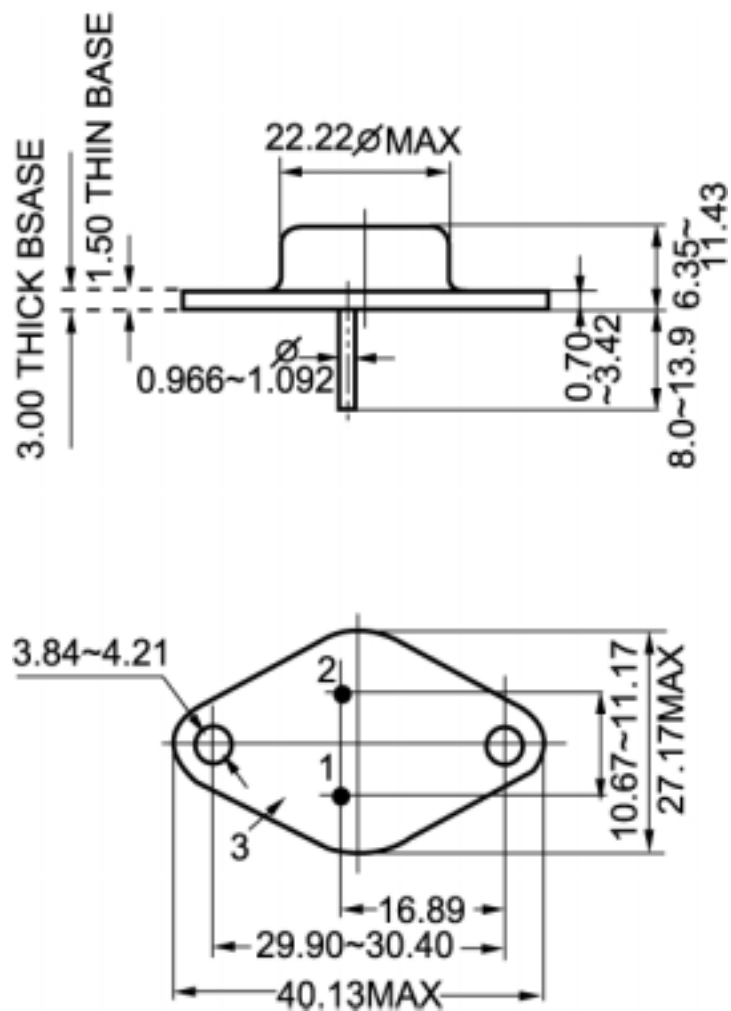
outline dimensions (unindicated tolerance:±0.1mm)
